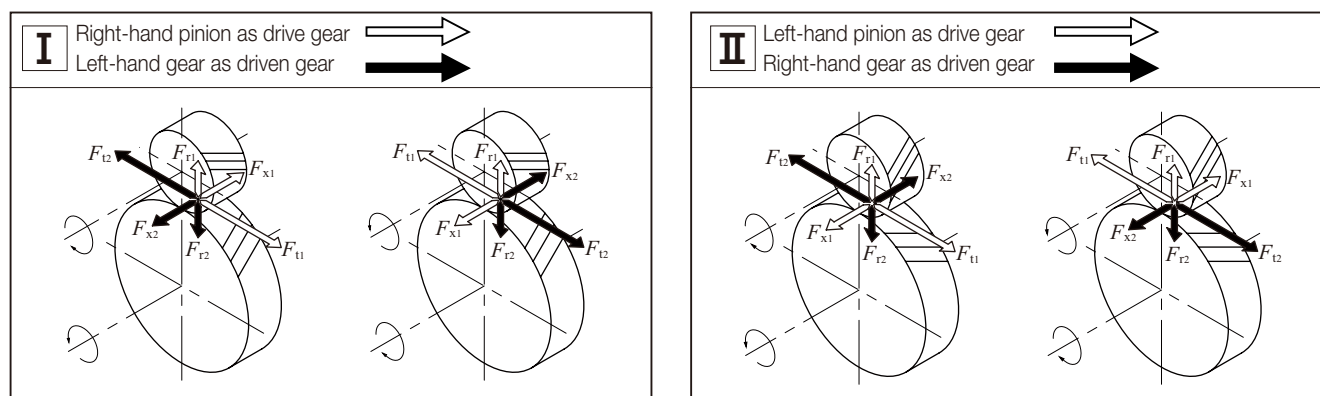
Direction of Forces acting on a Helical Gear Mesh
